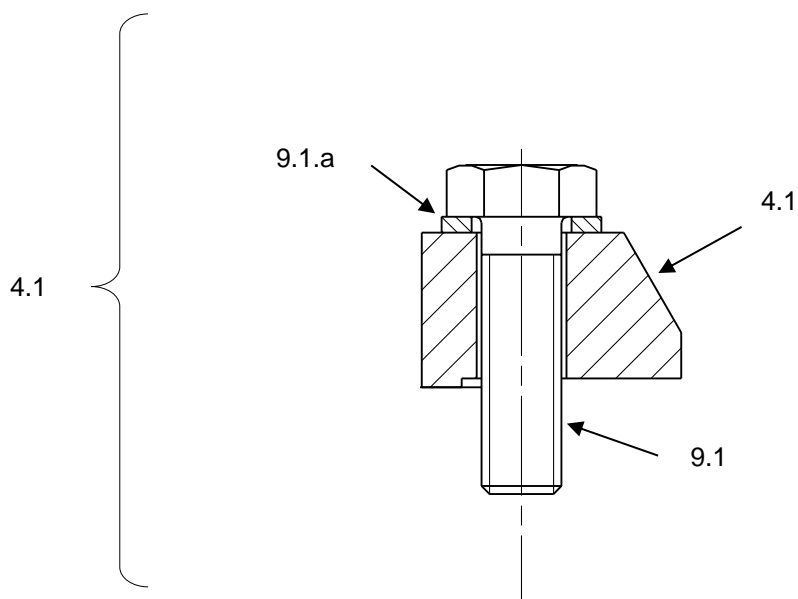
Clamp, Swashplate Duplex Bearing Posit
